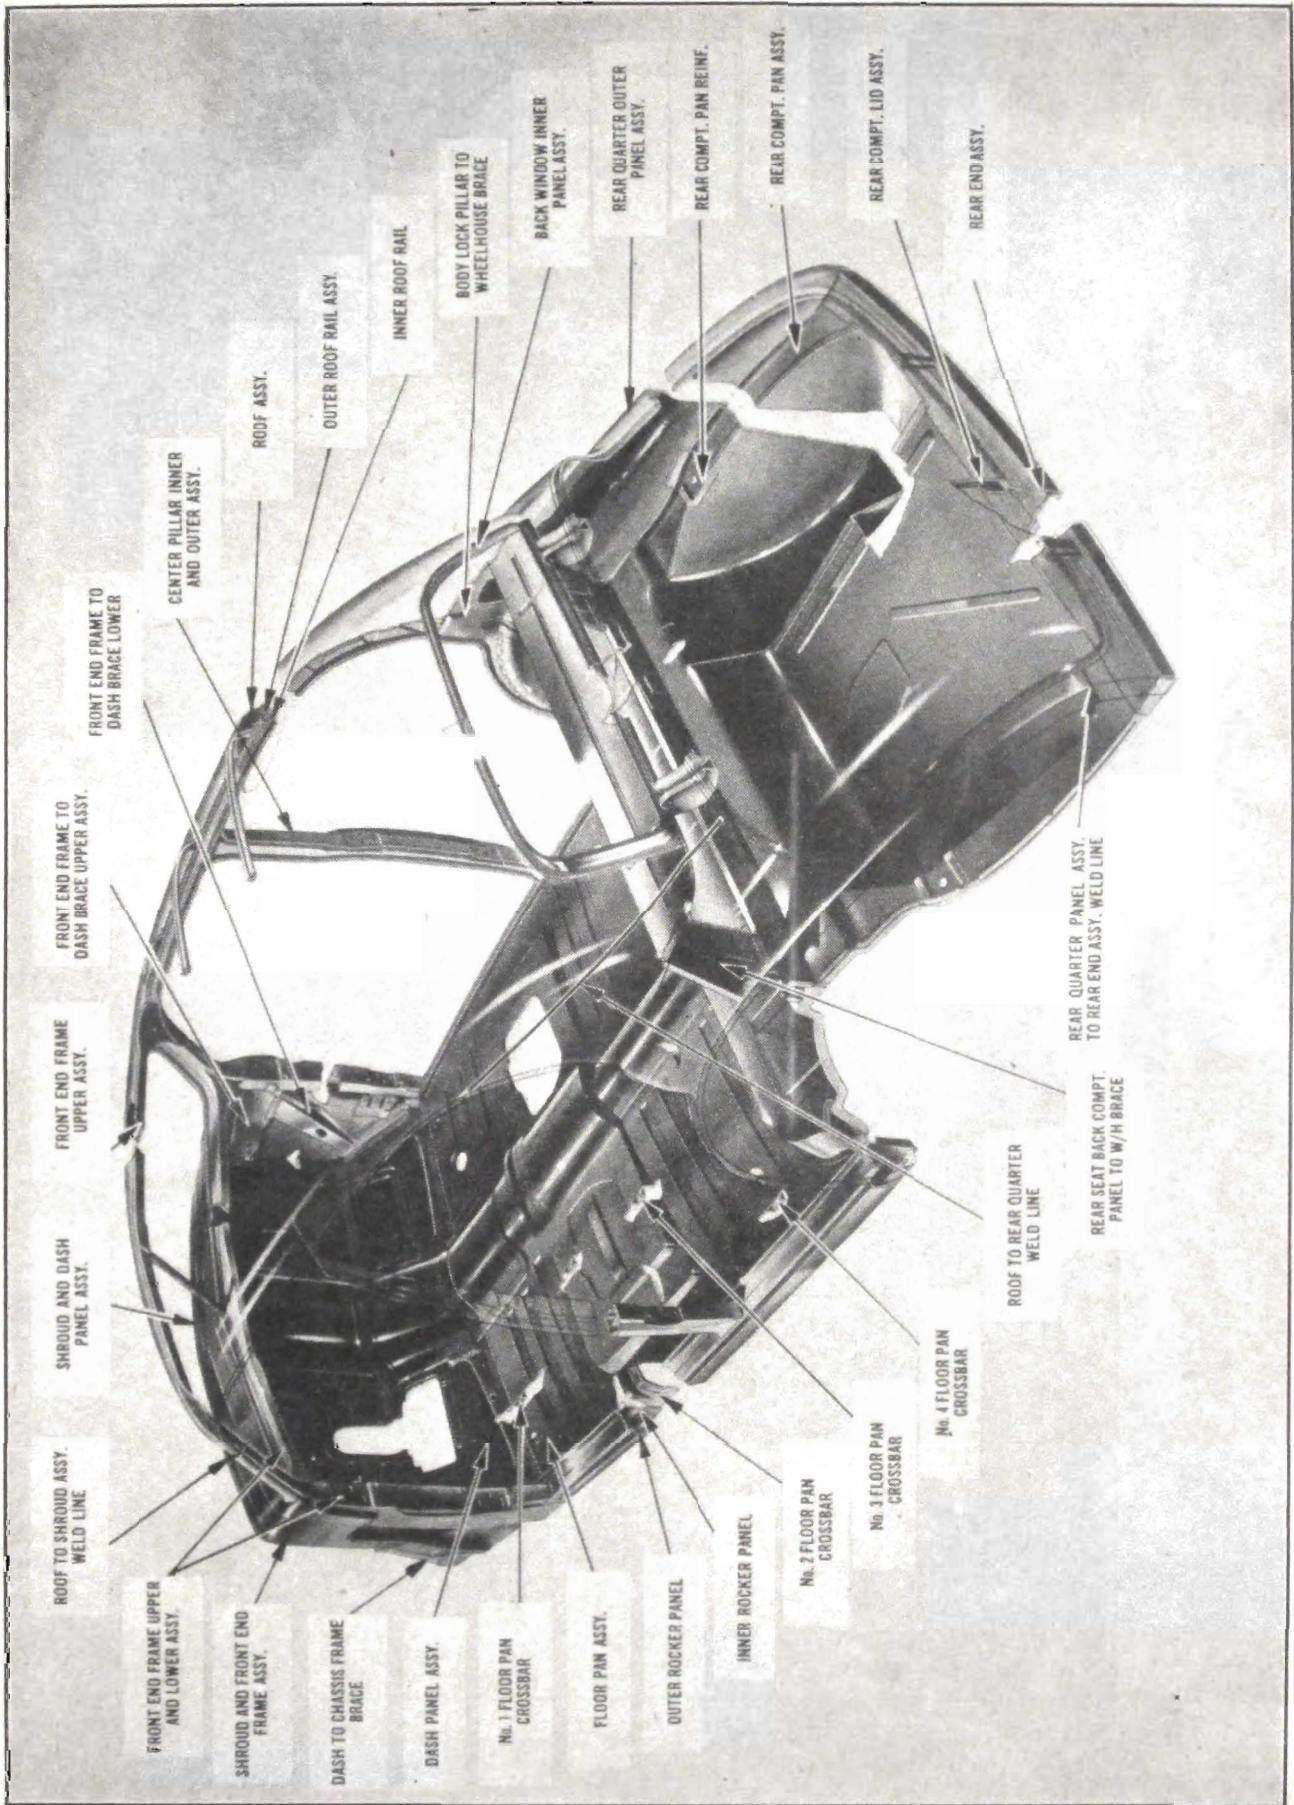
Phantom View—Series 50-70 Sedan—Showing Part Names and Major Panel Welding Lines
